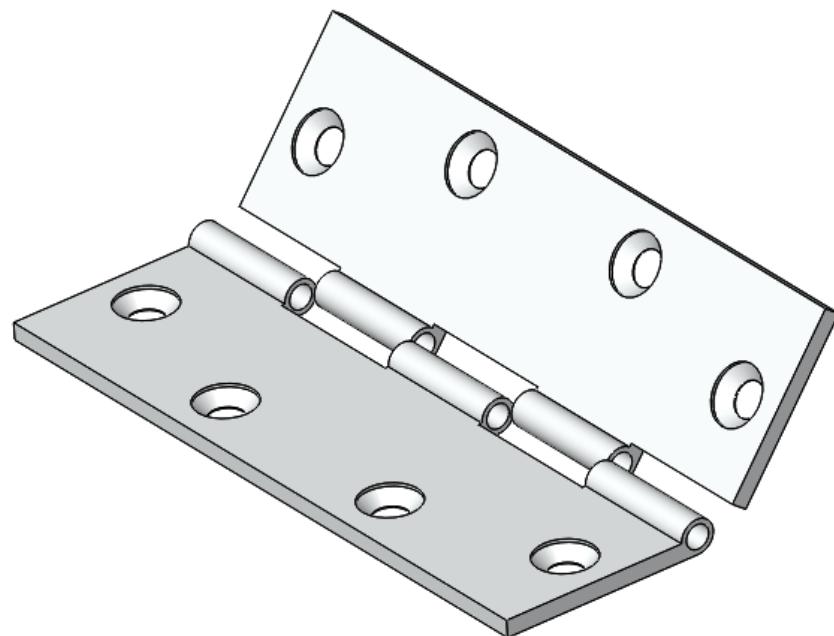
Ferrarer, Auston: Assembly Step 1
